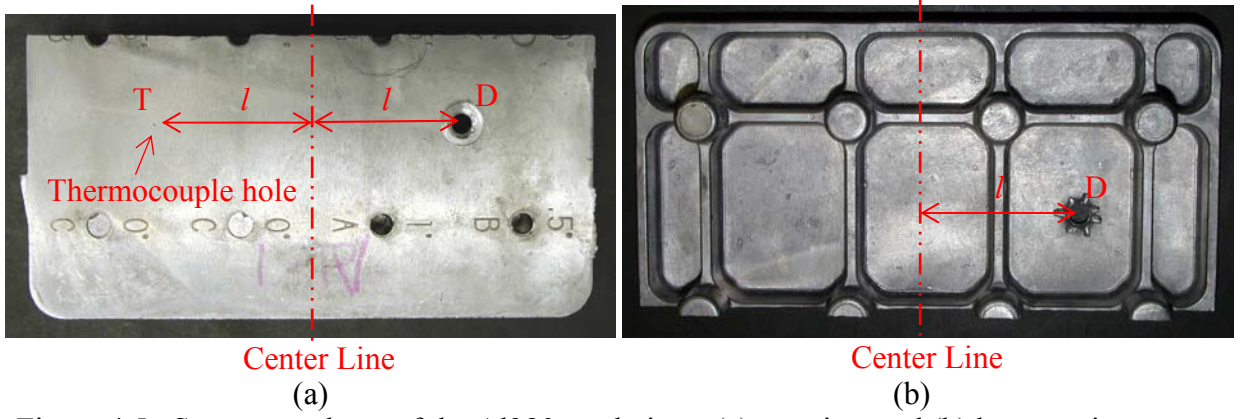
Symmetry shape of the Al380 workpiece: (a) top view and (b) bottom view.
